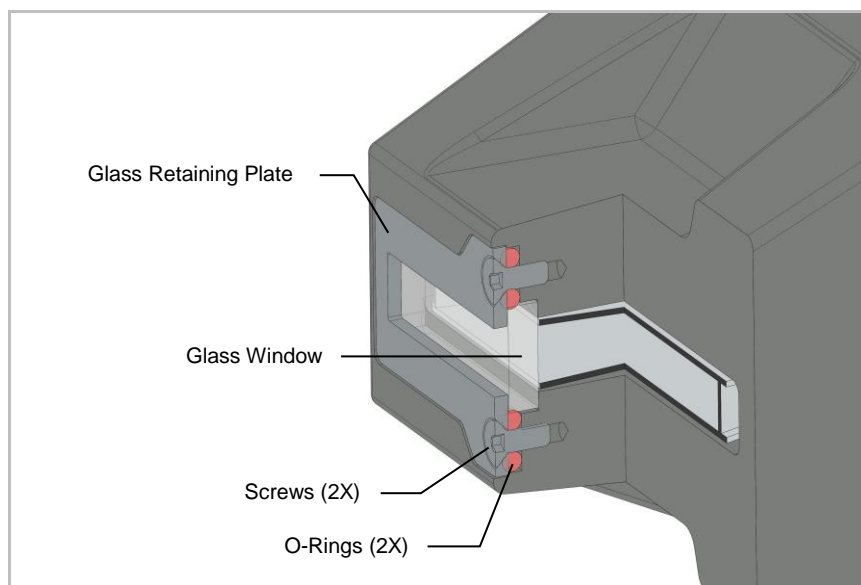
Cut-a-Way of Glass Window Pocket, All Parts Installed
